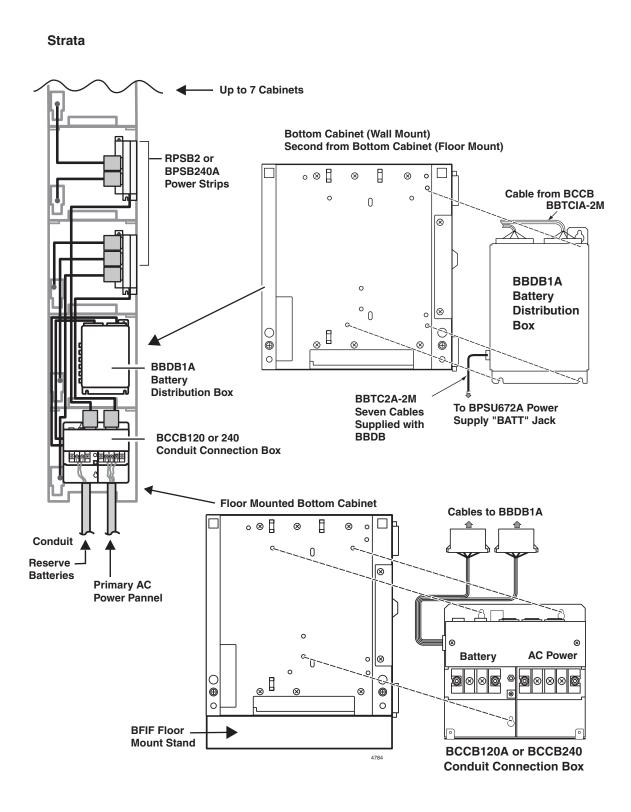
Battery Distribution and Conduit Connection Box Installation
